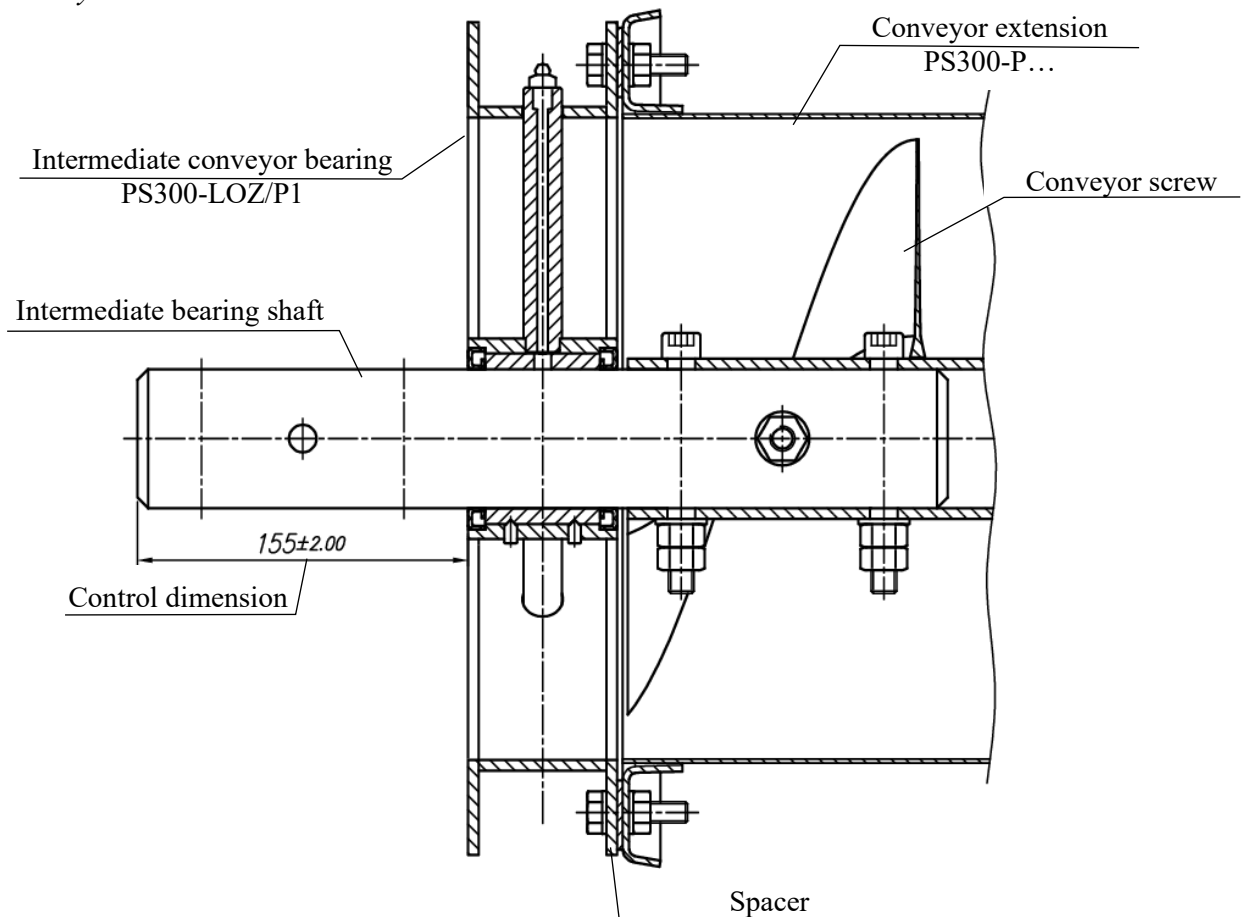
Correct extension length of the conveyor intermediate bearing shaft
